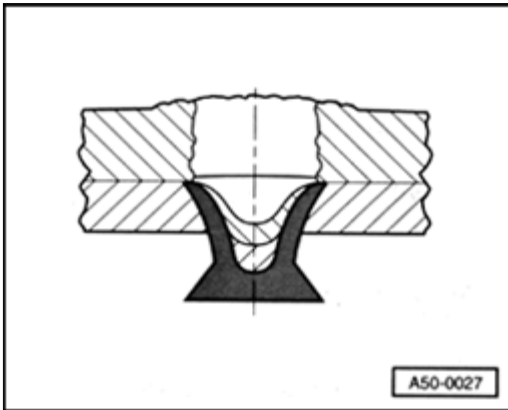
Identifying Hole Forms On Inner Panel While Punch Rivet Remains On Outside
